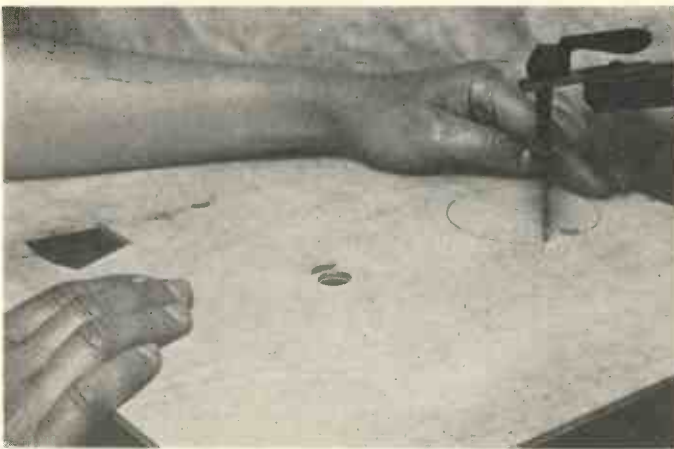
CUTTING LARGE HOLES IN THE PANEL WITH A FRETWORK MACHINE.
